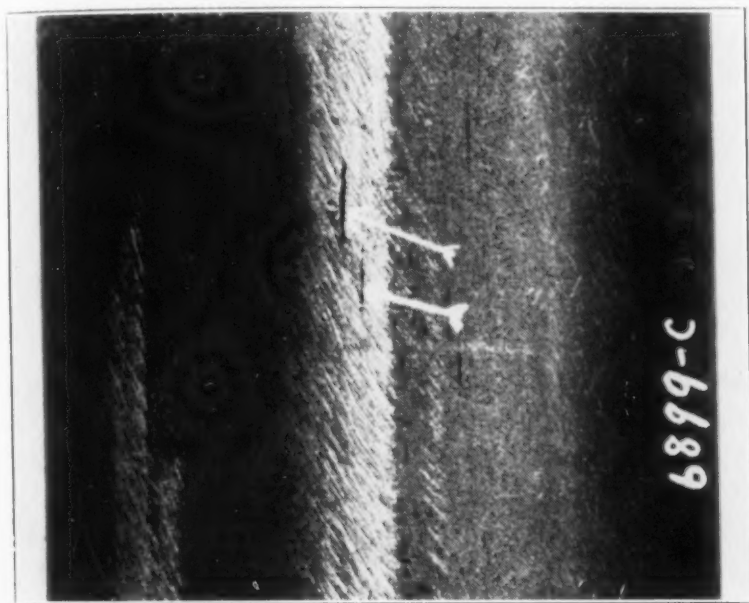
Photomicrograph of Shaft of Oil and Water Pump Drive Gear—Showing Defects. Specimen Coarse Etched. $\times 2\frac{1}{2}$.
